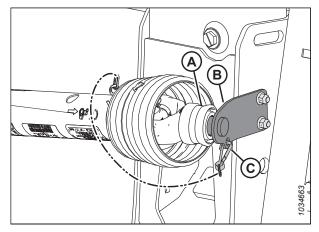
Driveline in Storage Position – Driveline MD #B7039
